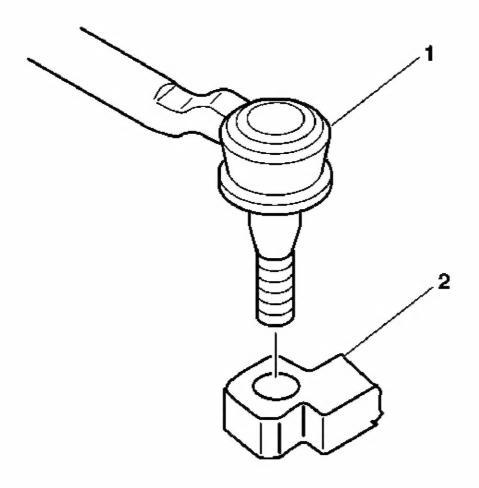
Installing Right Outer Tie Rod To Steering Knuckle Courtesy of GENERAL MOTORS CORP.
